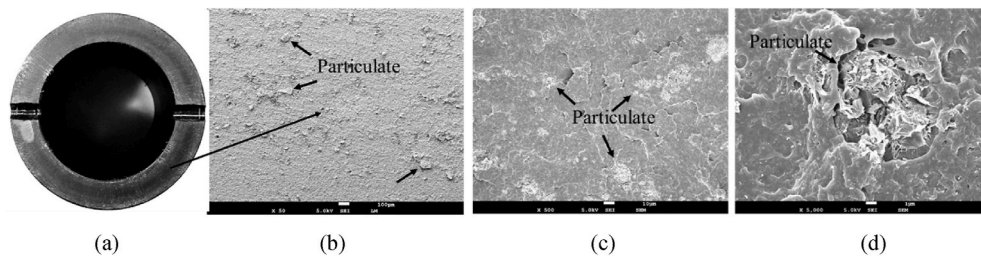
Fracture surface of AT tested FPC joint. (a) pipe cross-section, (b) x50, (c) x500 and (d) x5000.
